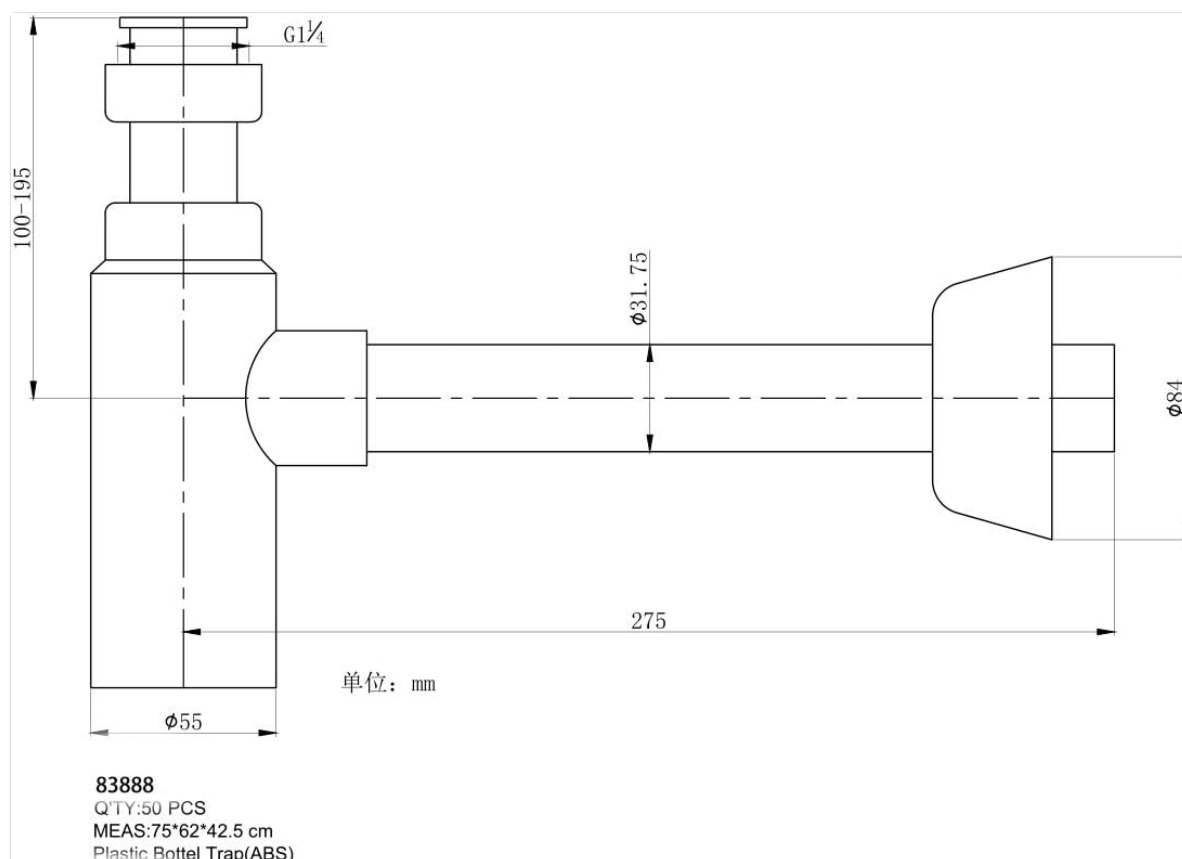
Technical drawing illustrating the dimensions of the bottle trap.
